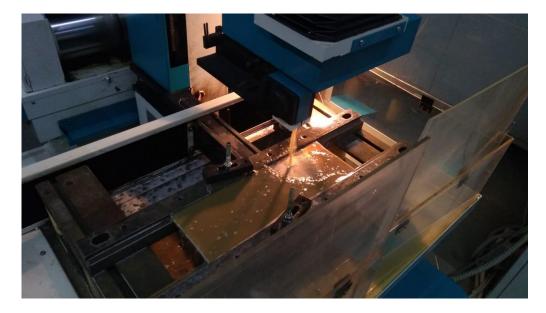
EZEECUT NXG CNC wire cut EDM machine cutting an Al6061-T6 sheet with 5mm thickness.
